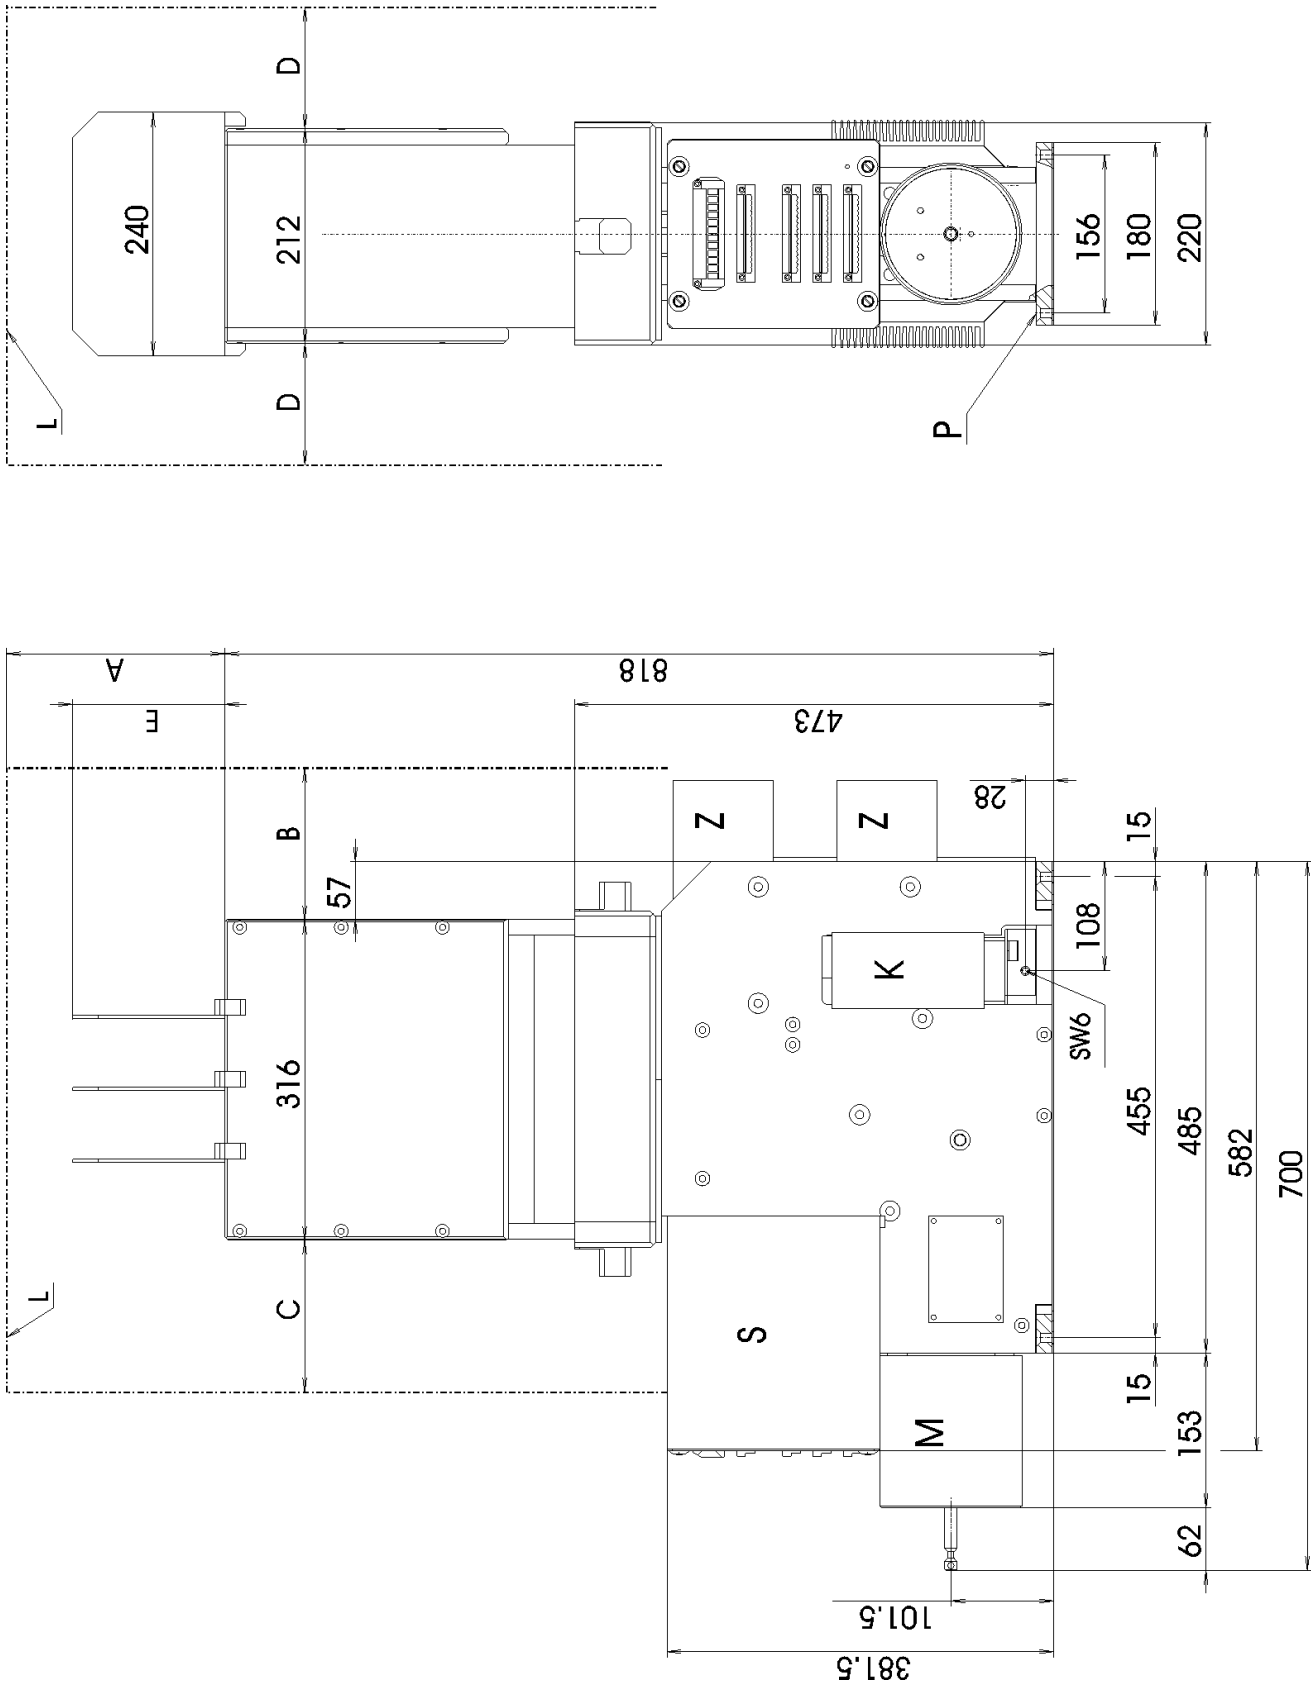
Gerapid 2607- 6007, arc chute 1X (Dimensions in mm)
